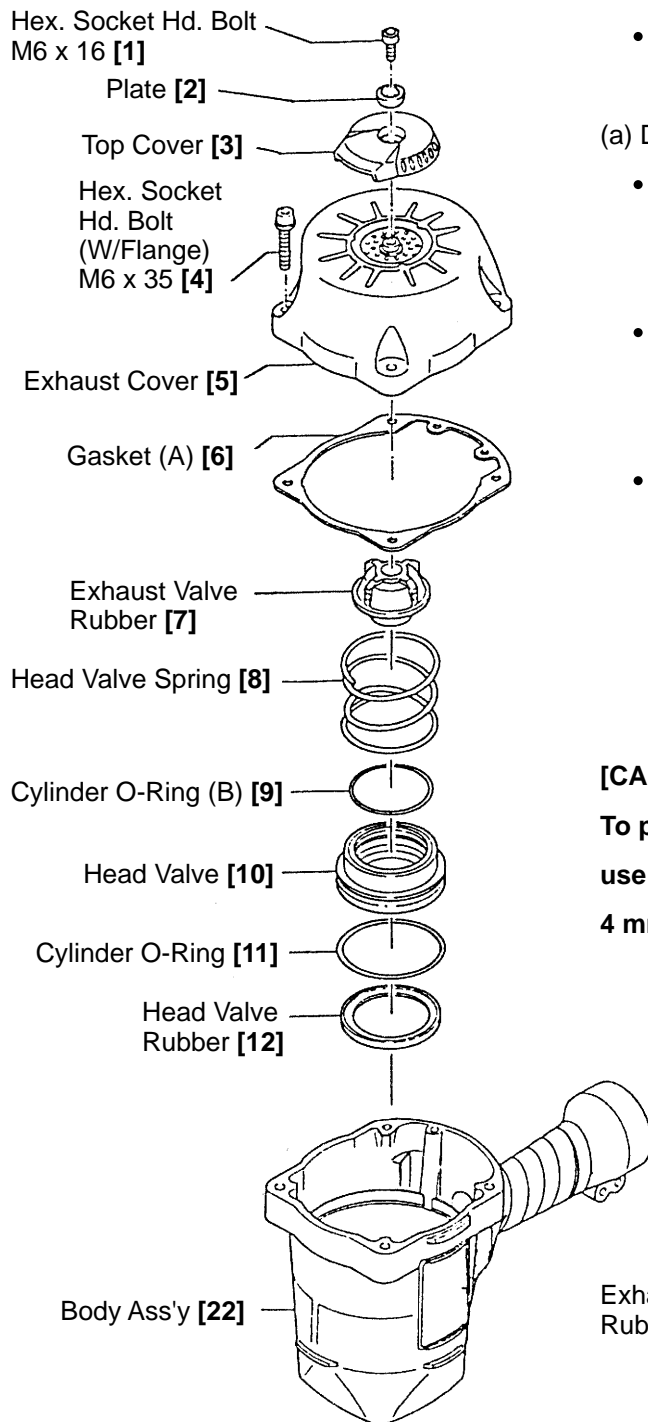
A Disassembly and reassembly of the Exhaust Cover, Head Valve, Exhaust Valve Rubber, etc.
